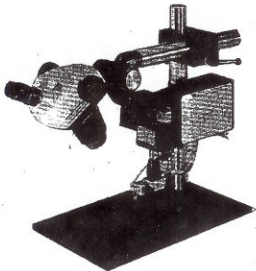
Model 50F/RF Reflow Soldering Head shown with optional Optic.
